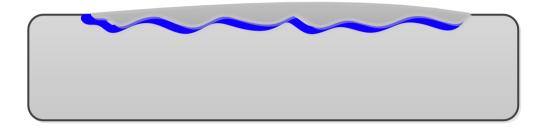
Additional filler added to fill the pits. Do not bridge them.
